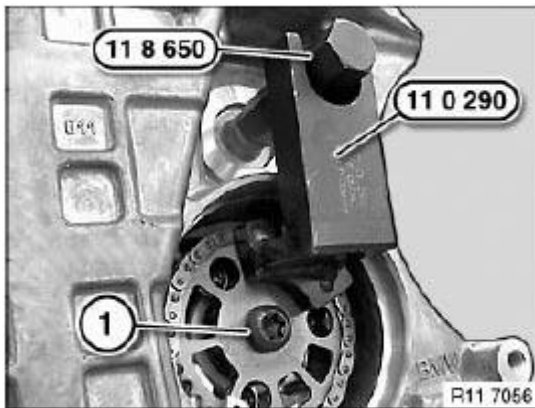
Identifying Central Bolt With Special Tools (11 8 650) And (11 0 290)
